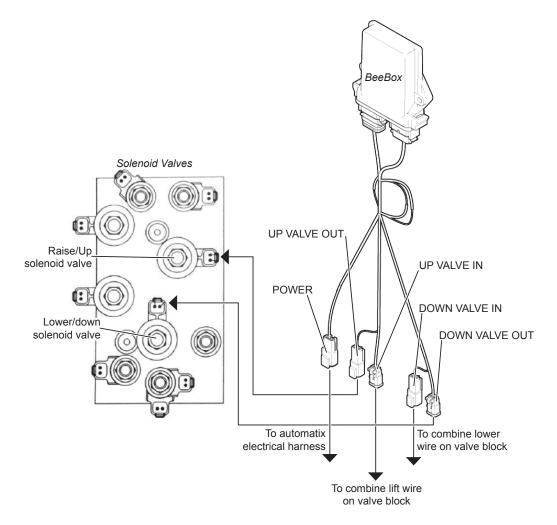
BeeBox - For 'Bang-Bang' Style Control Valve Combines
